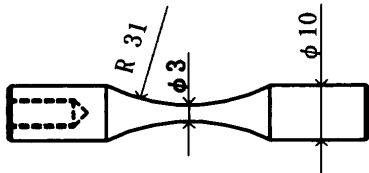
Fatigue test specimen for ultra-sonic fatigue test machine.
